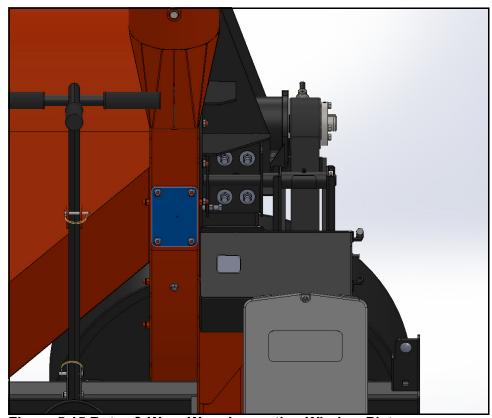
Rotor & Wear Wrap Inspection Window Plate
